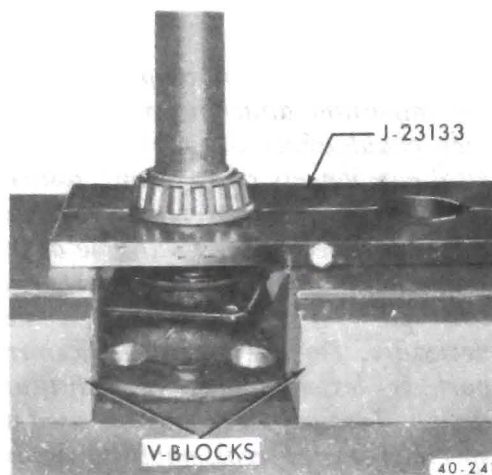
Removing Axle Shaft Bearing (43-44000)
